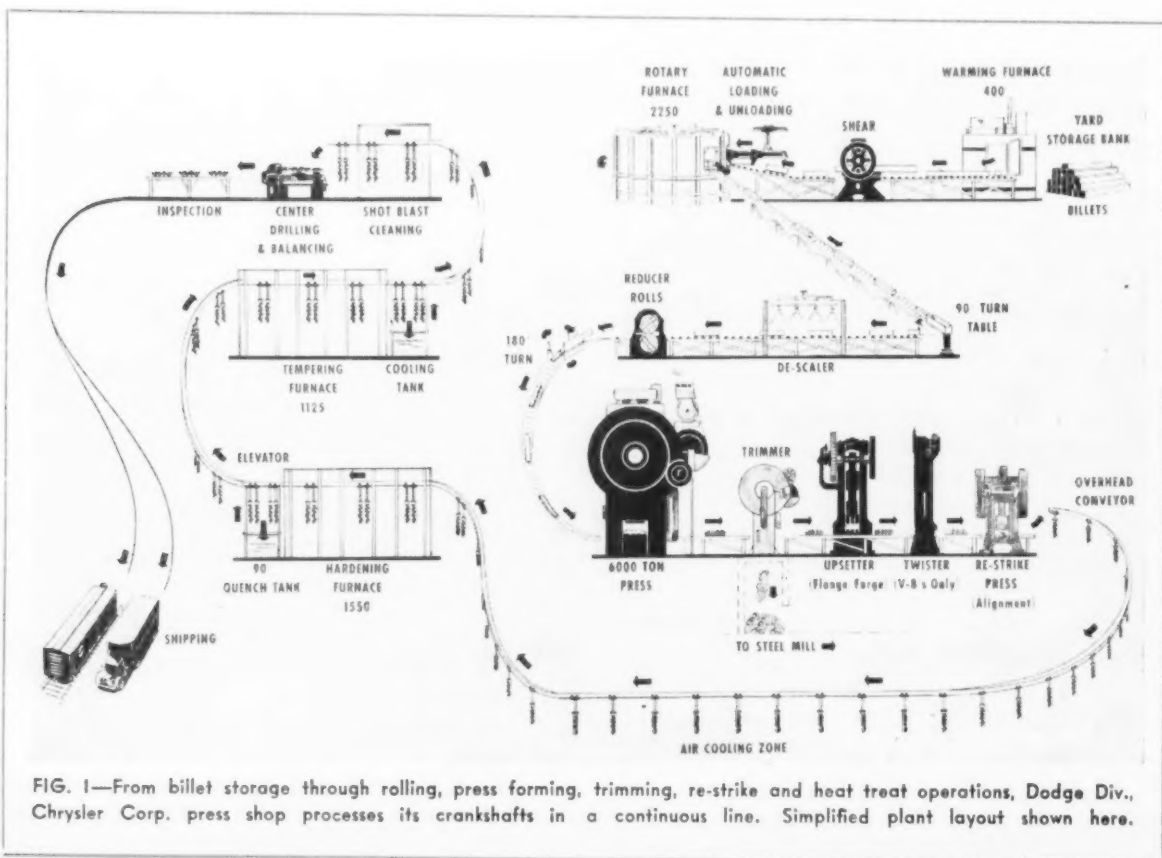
From billet storage through rolling, press forming, trimming, re-strike and heat treat operations, Dodge Div., Chrysler Corp. press shop processes its crankshafts in a continuous line. Simplified plant layout shown here.
